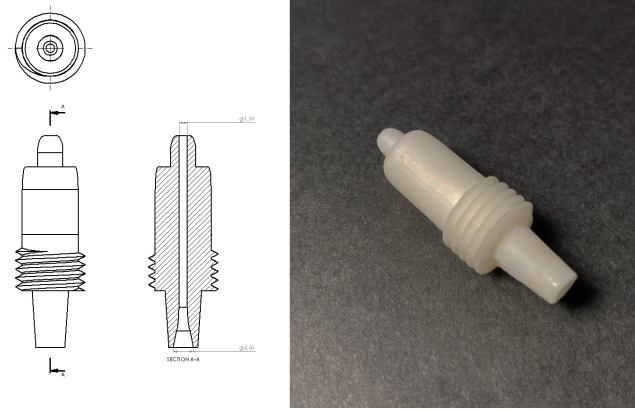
Valve connector. SLA printed part to connect the deposit tube to the solenoid valve system.
